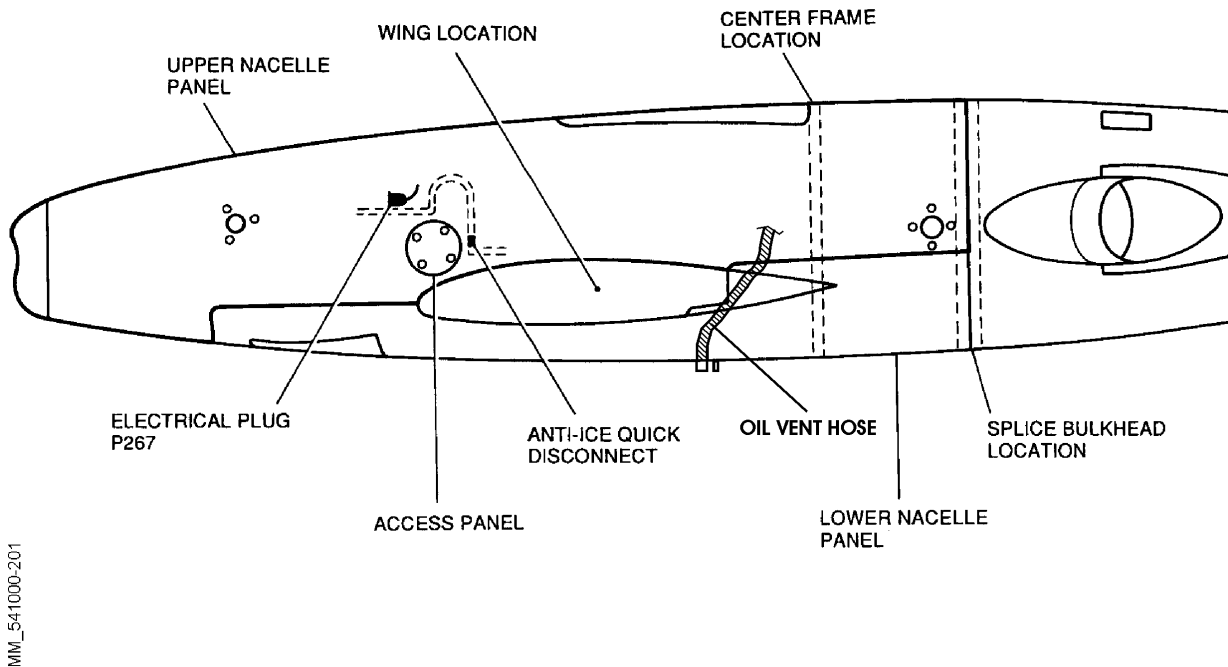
Upper Nacelle Panel - Removal and Installation
